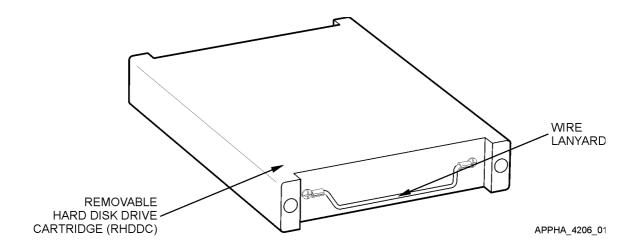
Removable Hard Disk Drive Cartridge (NSN 7025-01-474-5753)
